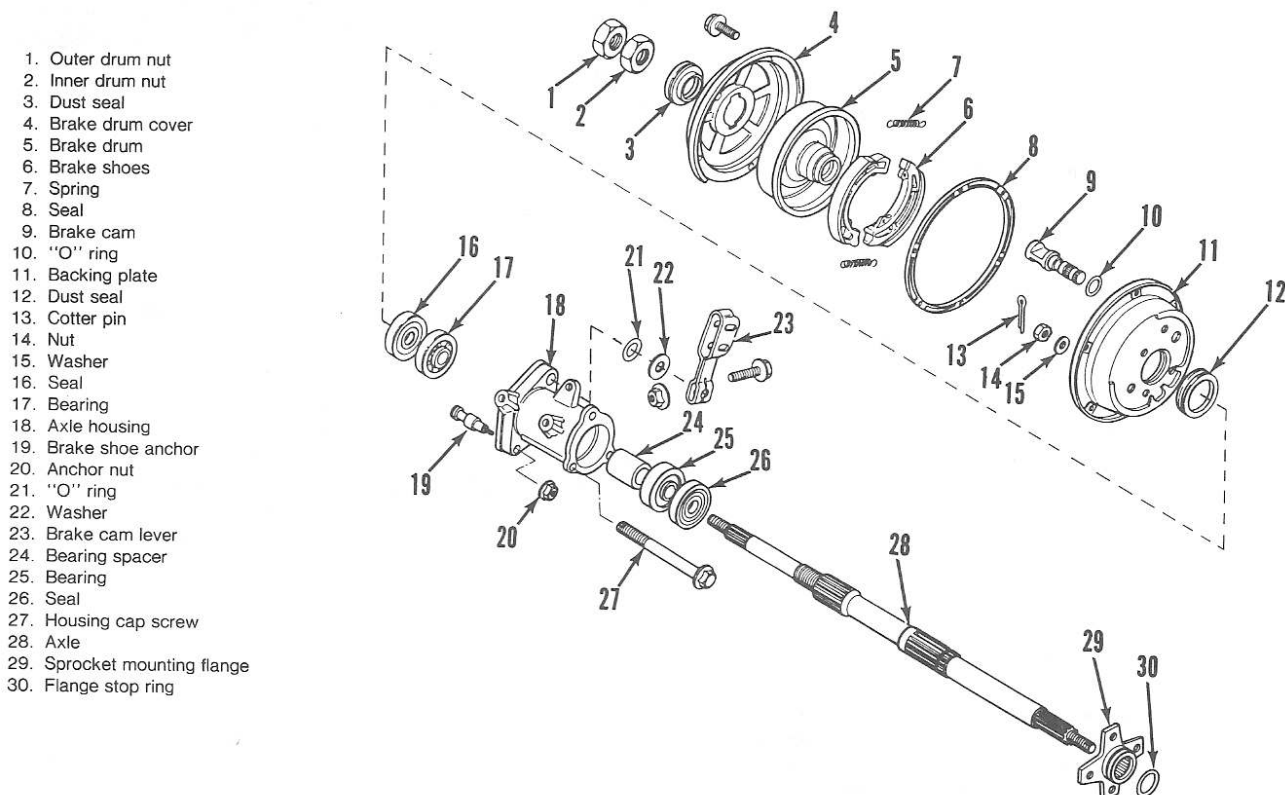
Exploded view of brakes and rear axle assembly used on ALT185 and LT185 models. ALT125 and LT125 models are similar.
